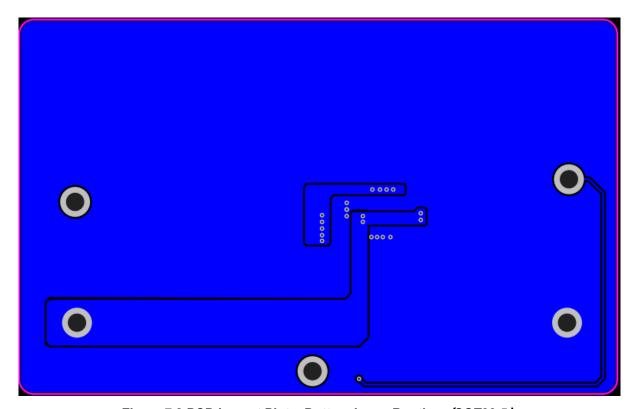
PCB Layout Plots: Bottom Layer Routing (SOT23-5)
